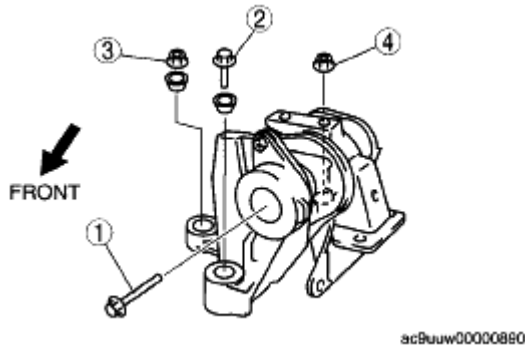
Identifying No.3 Engine Mount Bolt And Nut Tightening Sequence
